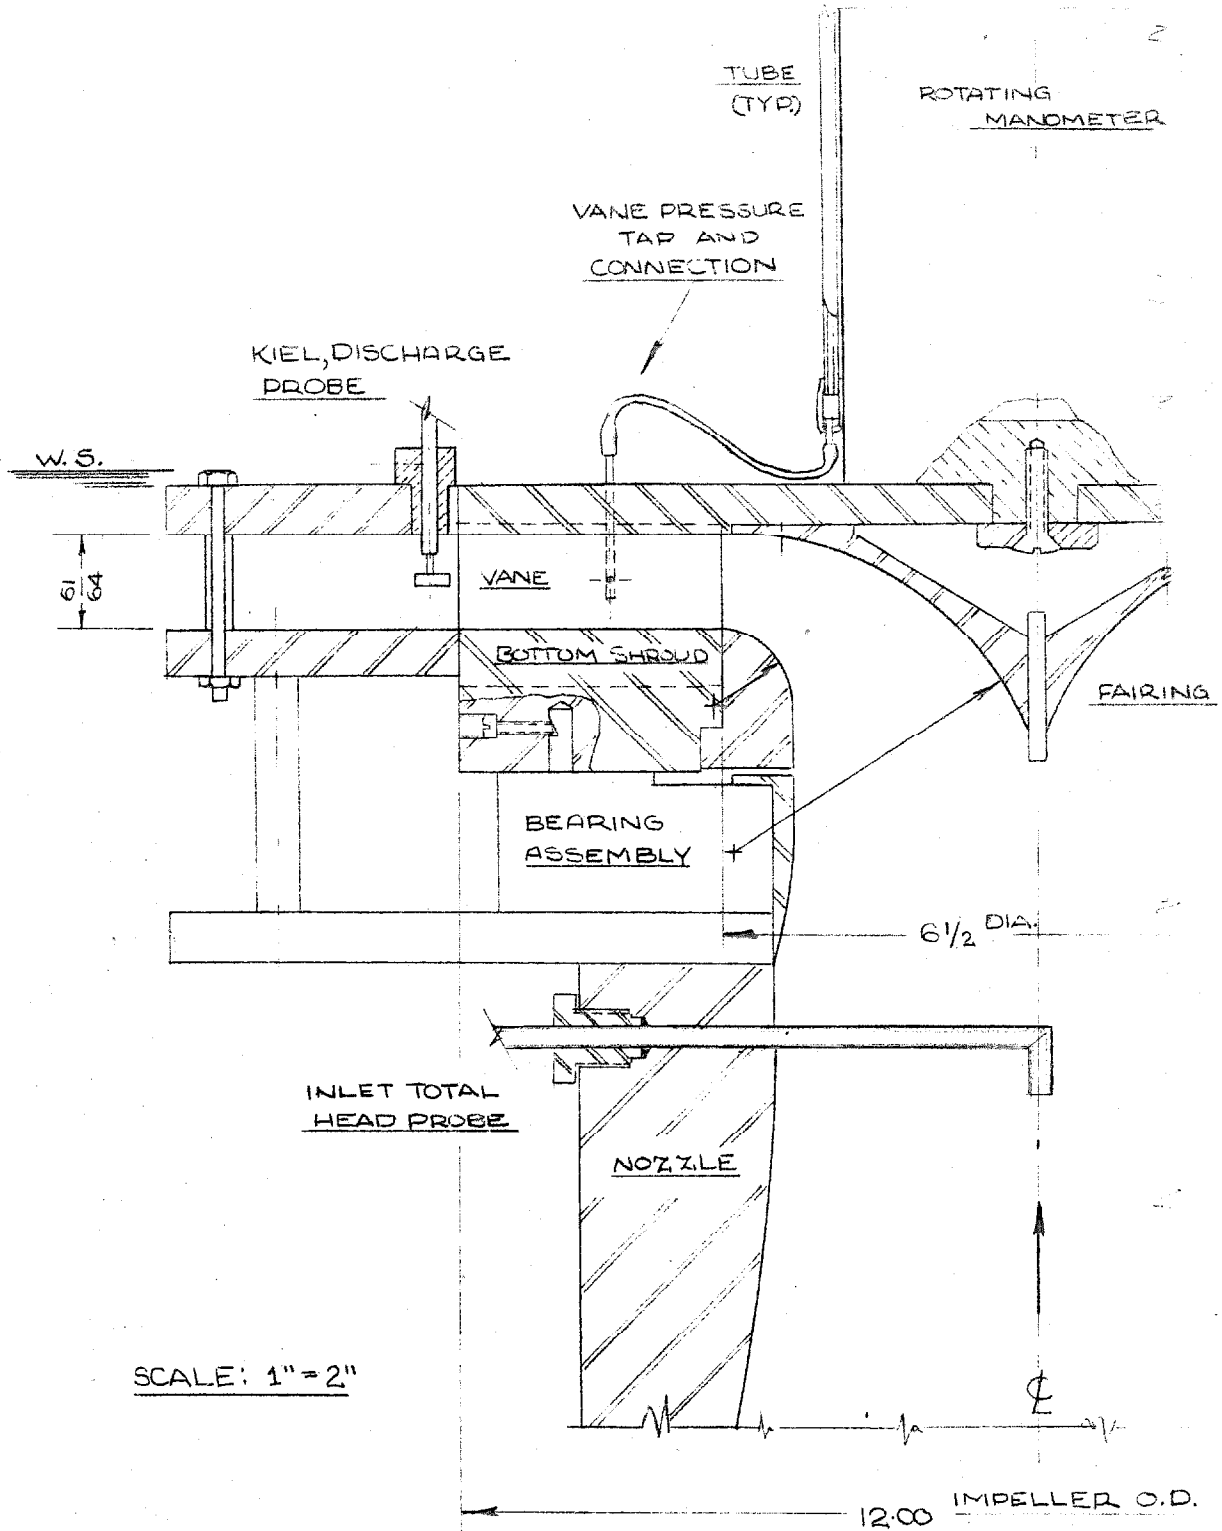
IMPELLER ASSEMBLY SHOWING INSTRUMENTATION
